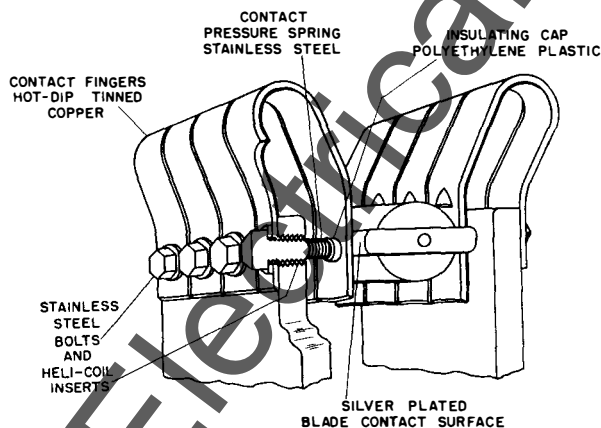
Jaw contact-finger assembly, 70,000 ampere momentary
